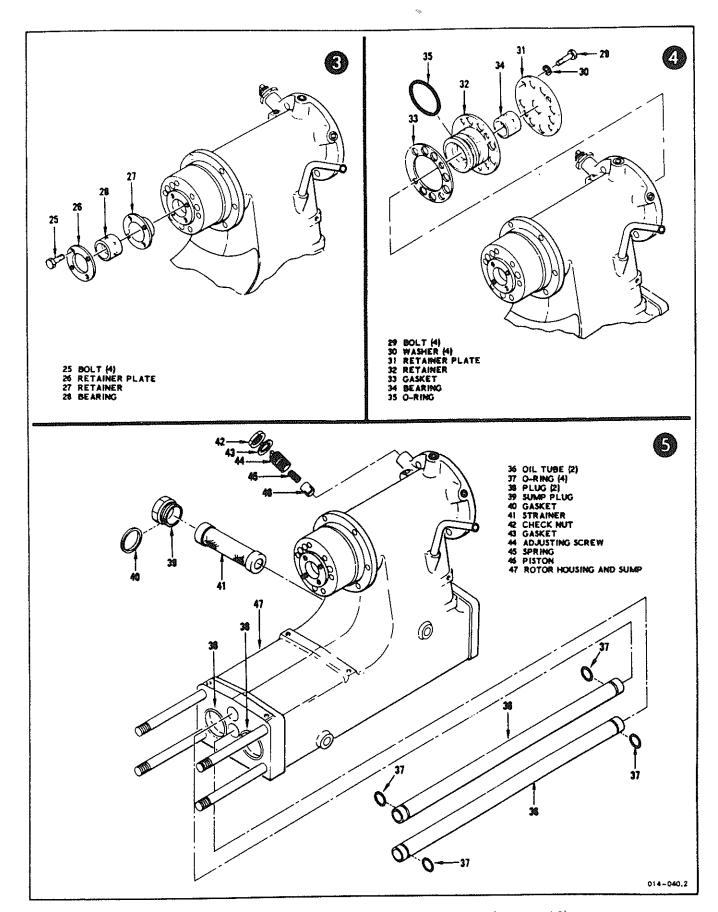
Rotor Housing and Sump, Exploded View (Sheet 2 of 2)
